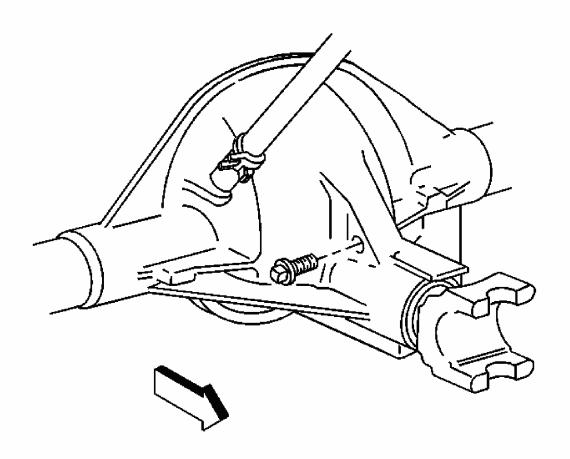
View Of Rear Axle Fill Plug Courtesy of GENERAL MOTORS CORP.
